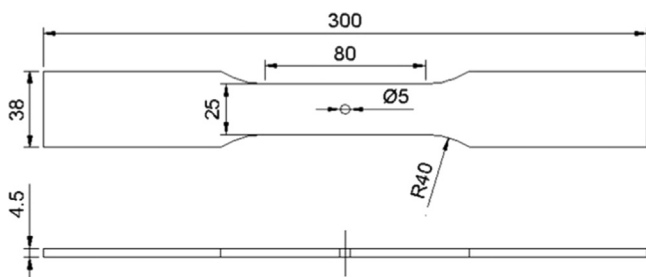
Dimensions of the open hole specimens (mm) [28].
